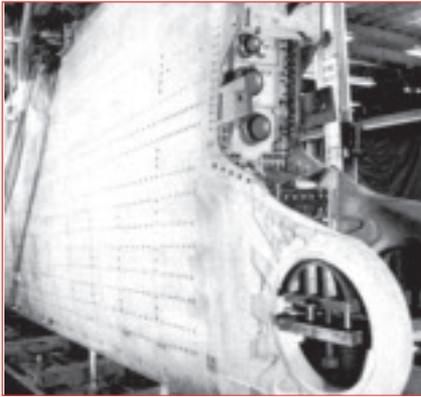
Assembled right wing showing the upper and lower forged and machined pivot fittings.
